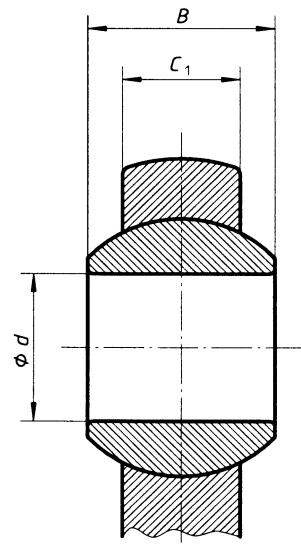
Spherical plain bearing rod end with inner ring only (integral design)¹⁾
